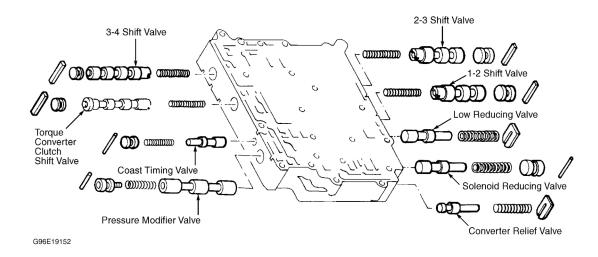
Exploded View Of Main Valve Body (GF4A-EL) Courtesy of MAZDA MOTORS CORP.
